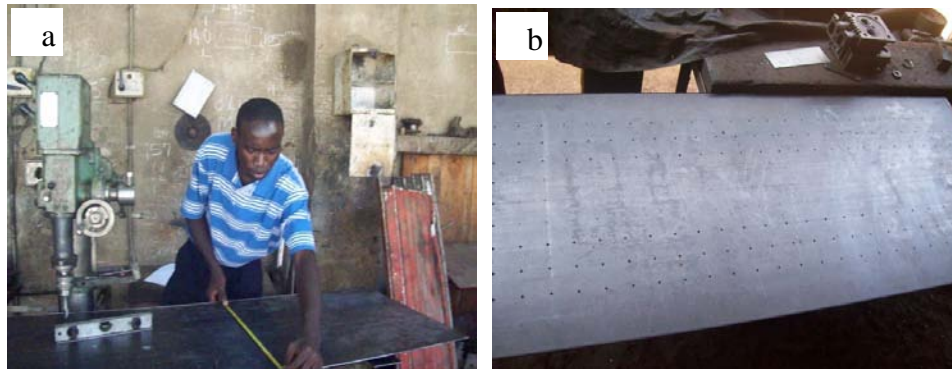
Measurement and drilling of holes in the optical table: (a) Measurement of table top dimensions; and (b) Spatially drilled table top.
